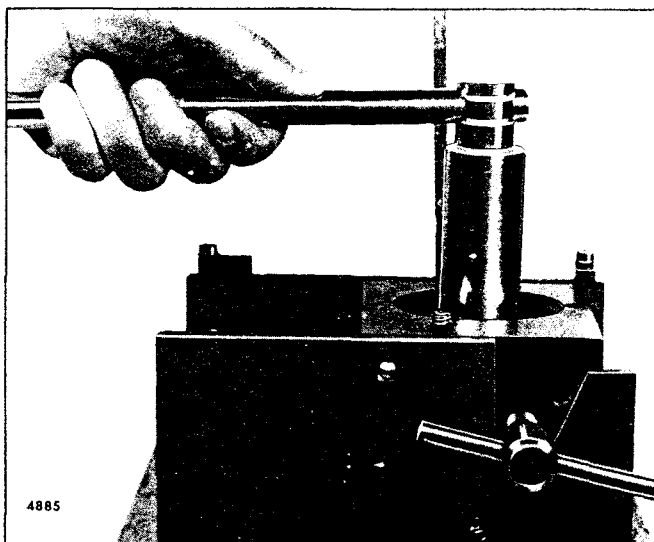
Removing Injector Nut Using Tool J 4983-01
